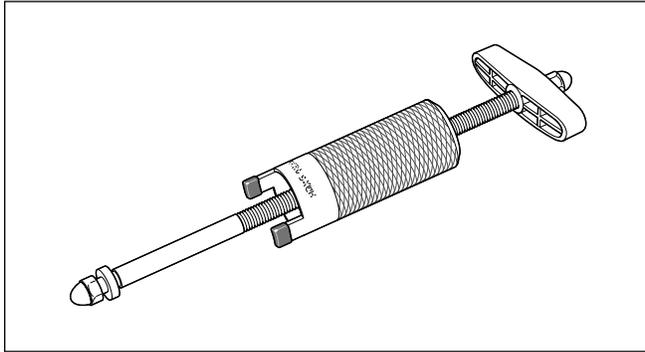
Piston Pin Remover (Part No. HD-42320A)
